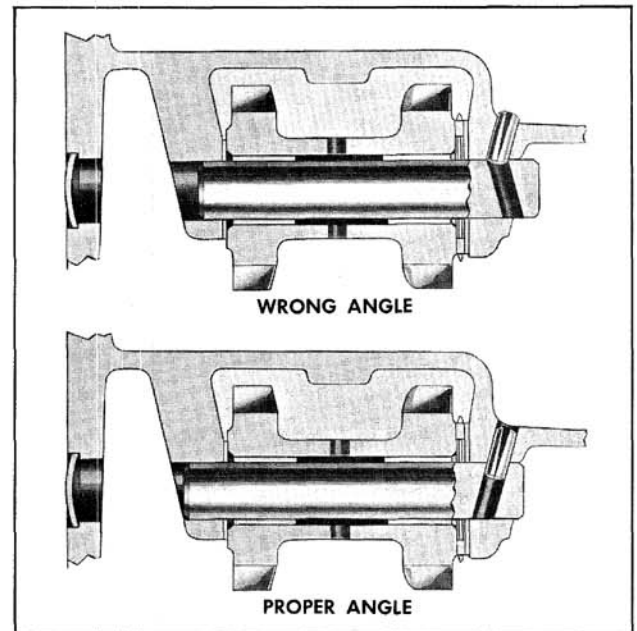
Reverse Idler Gear Shaft and Lock Pin
